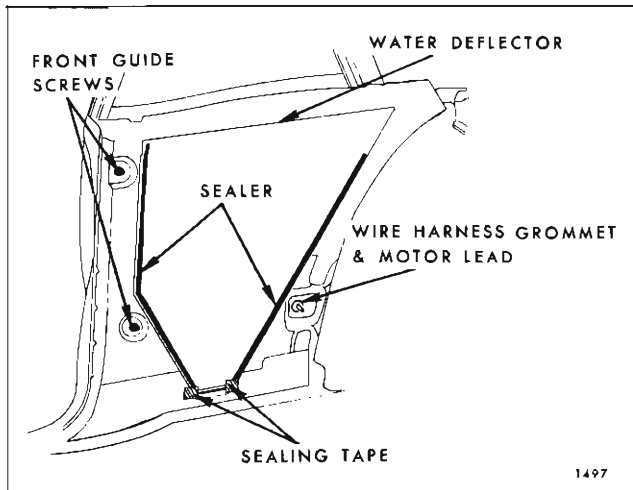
E14—Rear Quarter Inner Panel Sealing "11" Styles
